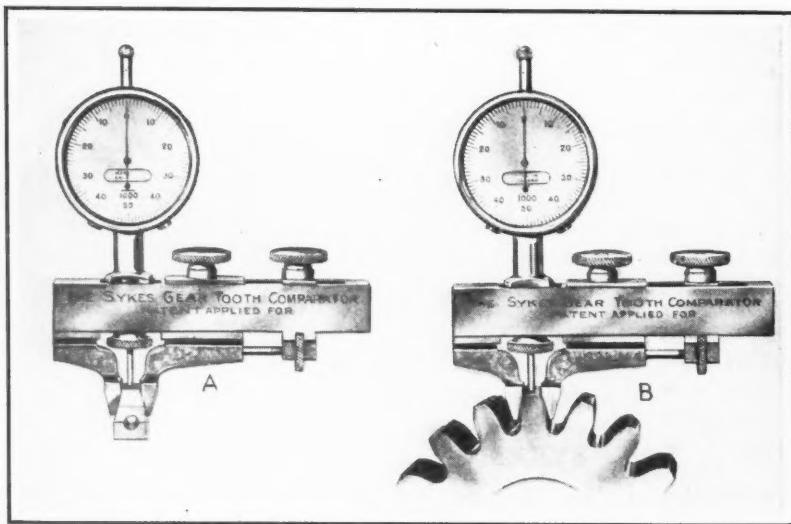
Illustrations showing how the Sykes Gear Tooth Comparator is set and applied
